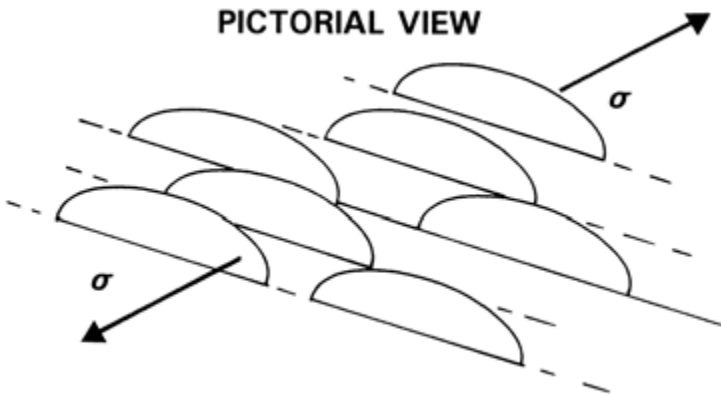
Ground surfaces contain a dense network of machining cracks. This simplified schematic does not show cracks running parallel to the stress axis or lateral cracks parallel to the surface.
